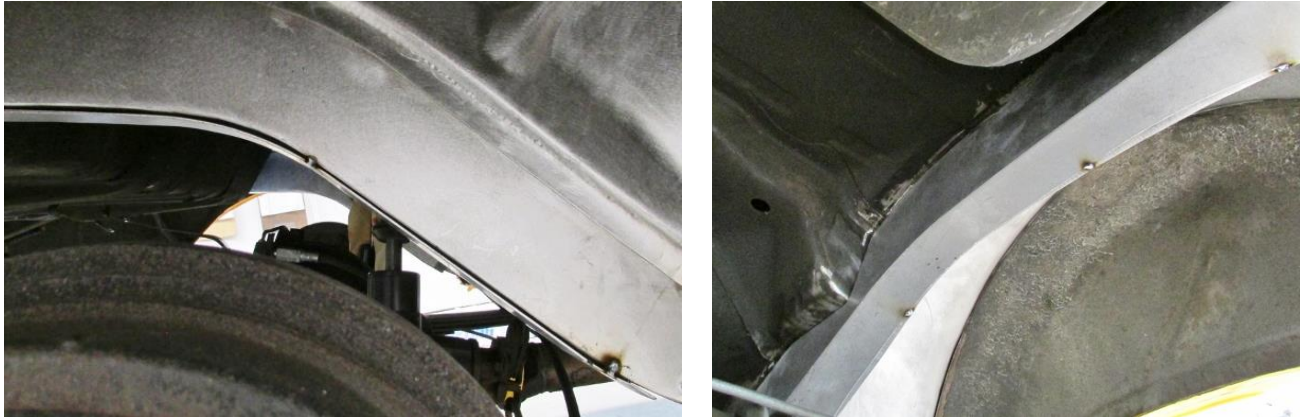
Tack Weld Inner Frame Rail Doubler (Passenger Side)
